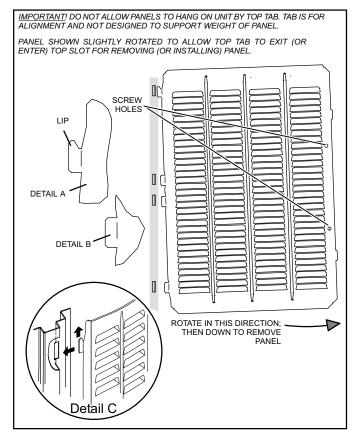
Removing/Installing *SmartHinge*[™] Panels (Details A, B and C)
